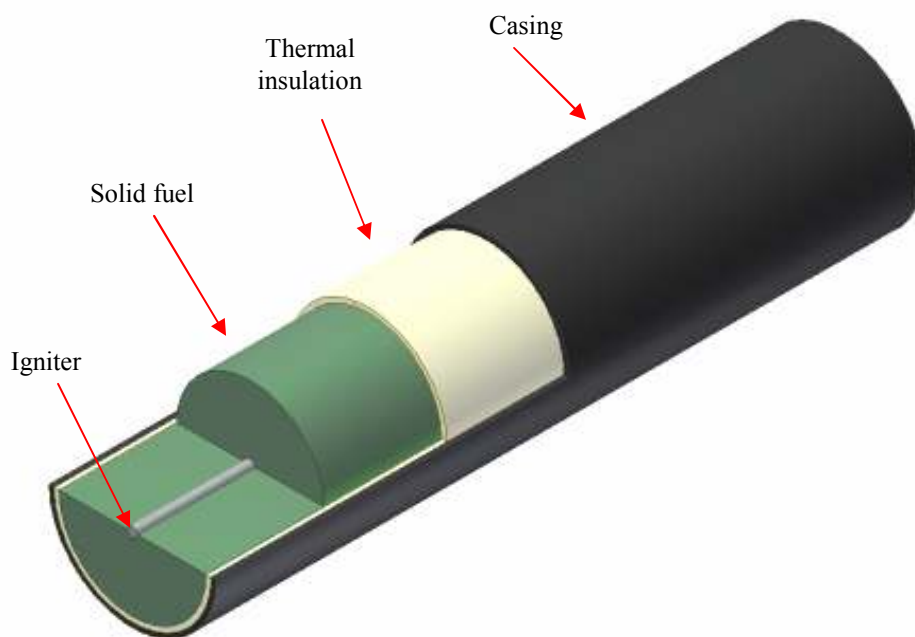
Simple Cylindrical Solid Rocket Motor Casing
